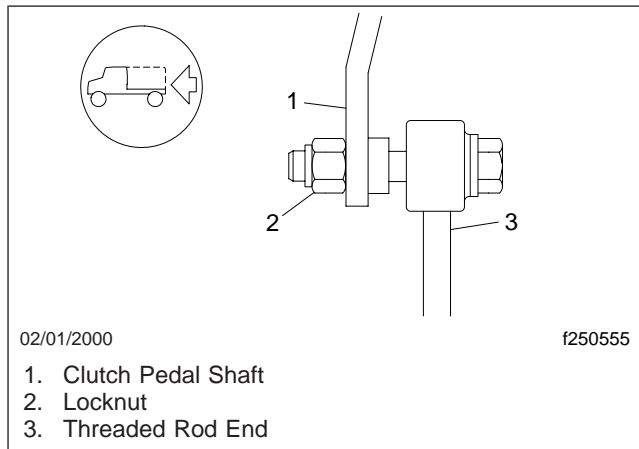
, Connect the Clutch Rod to the Pedal Shaft
